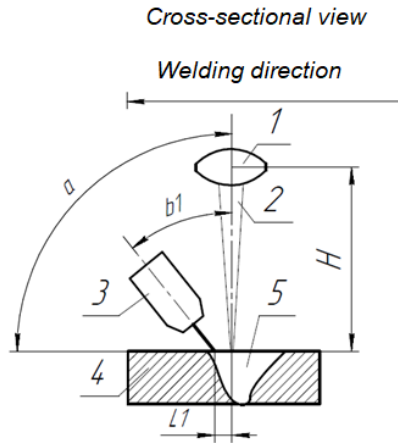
LAHW scheme, "hybrid" method of butt welds in downhand position (PA):
